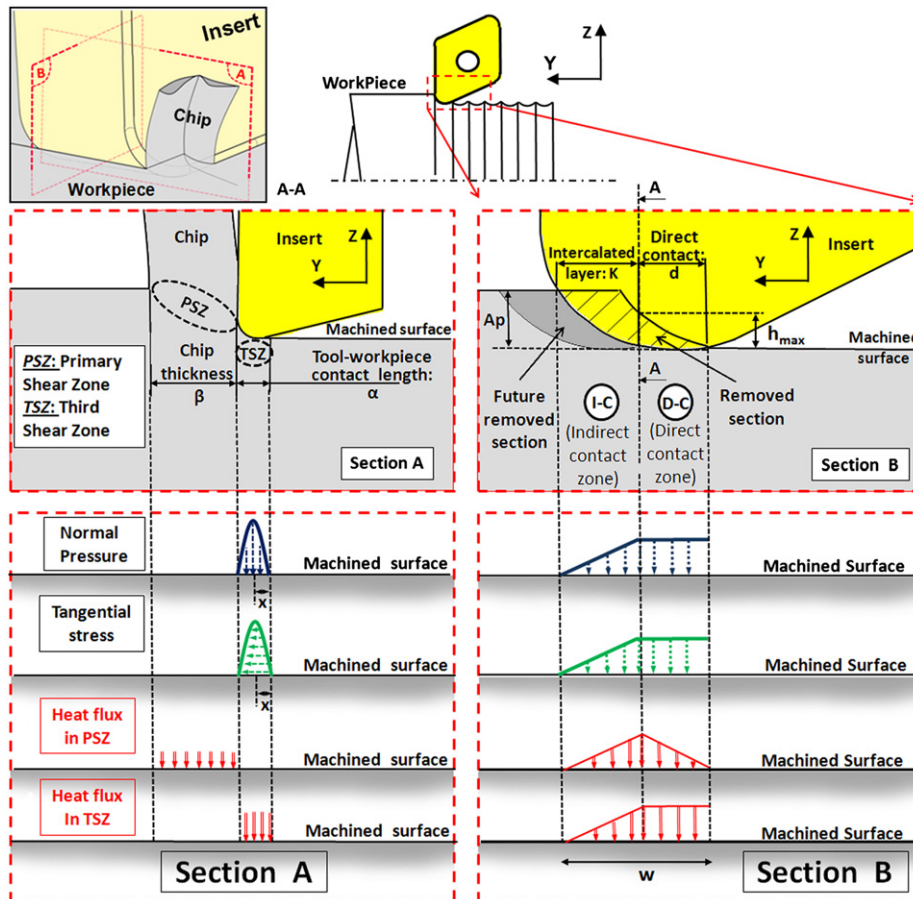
Thermo-mechanical loadings at the "tool-machined surface" interface.
